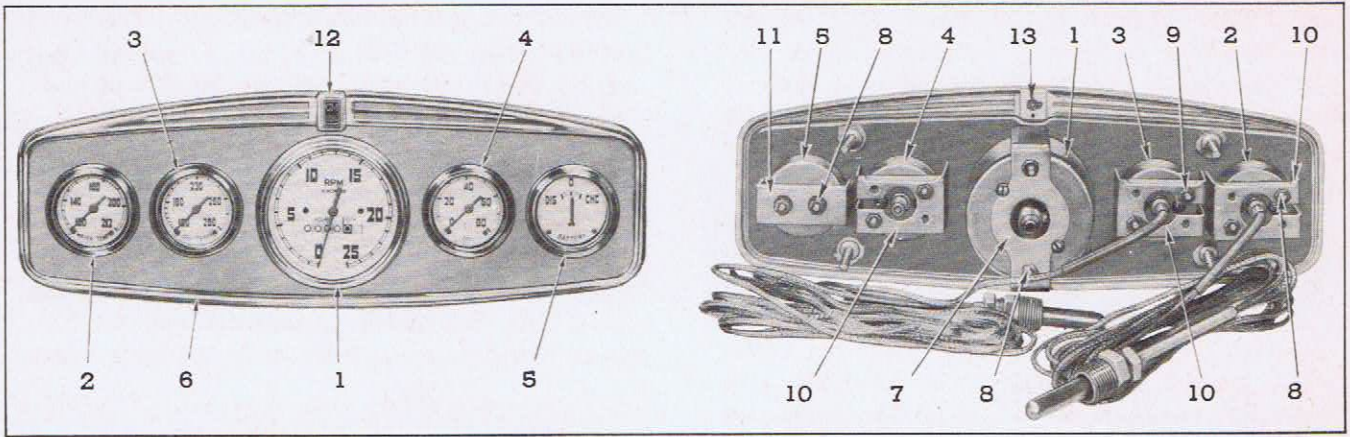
MECHANICAL INSTRUMENT PANEL ASSEMBLY FOR SINGLE ENGINE UNIT.
